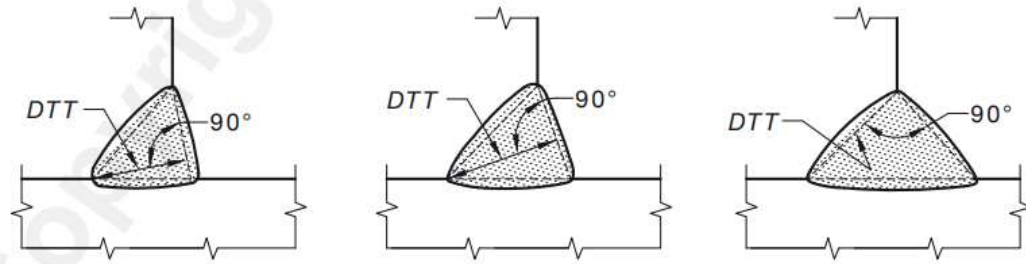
design throat thickness of compound welds with incomplete penetration welds
